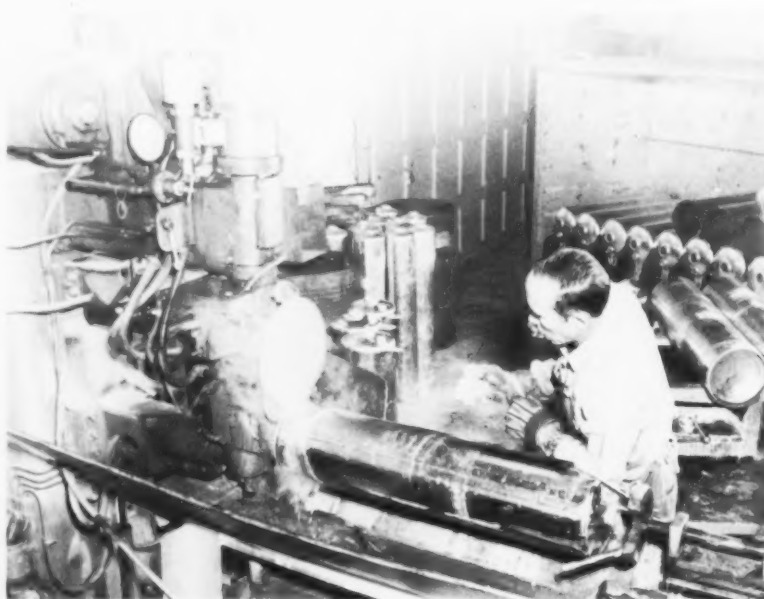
Sciaky Seam Welder joins the bottom to the shell.
